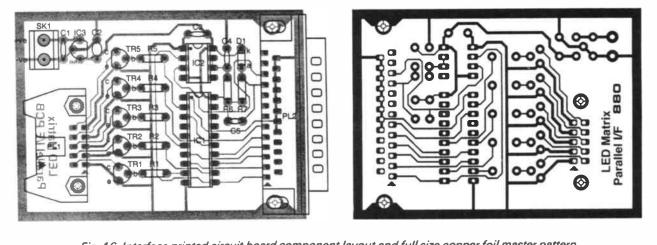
Interface printed circuit board component layout and full size copper foil master pattern.
